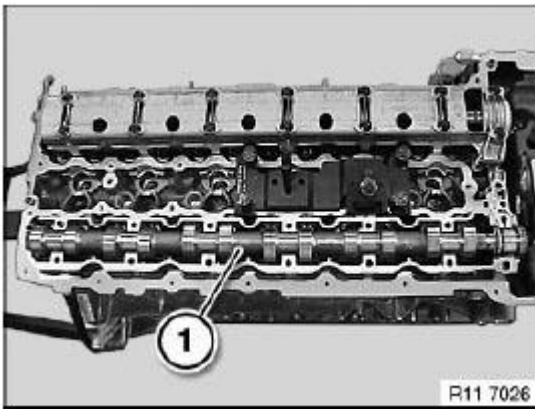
Identifying Exhaust Camshaft In Lower Bearing Bank
